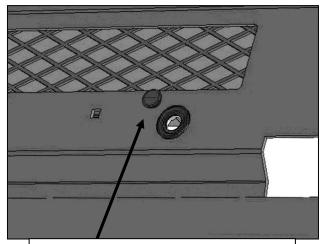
B) Attach Driver/left Support Bracket to side and threaded hole in bottom of frame extension (fig 9)
